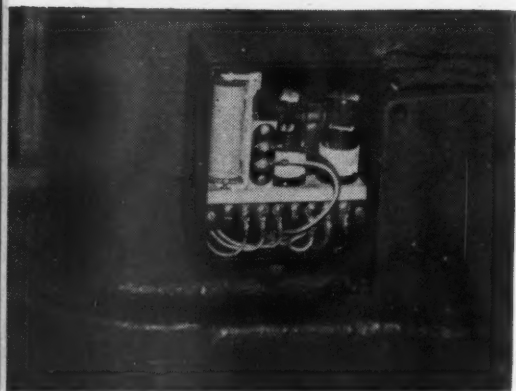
Dual electronic switch mounted to base of machine amplifies minute tolerance gage currents for operation of vacuum tube time delay relays in coolant and feed motor circuits. One tube is for rough and one for finish grind contact on gage.
